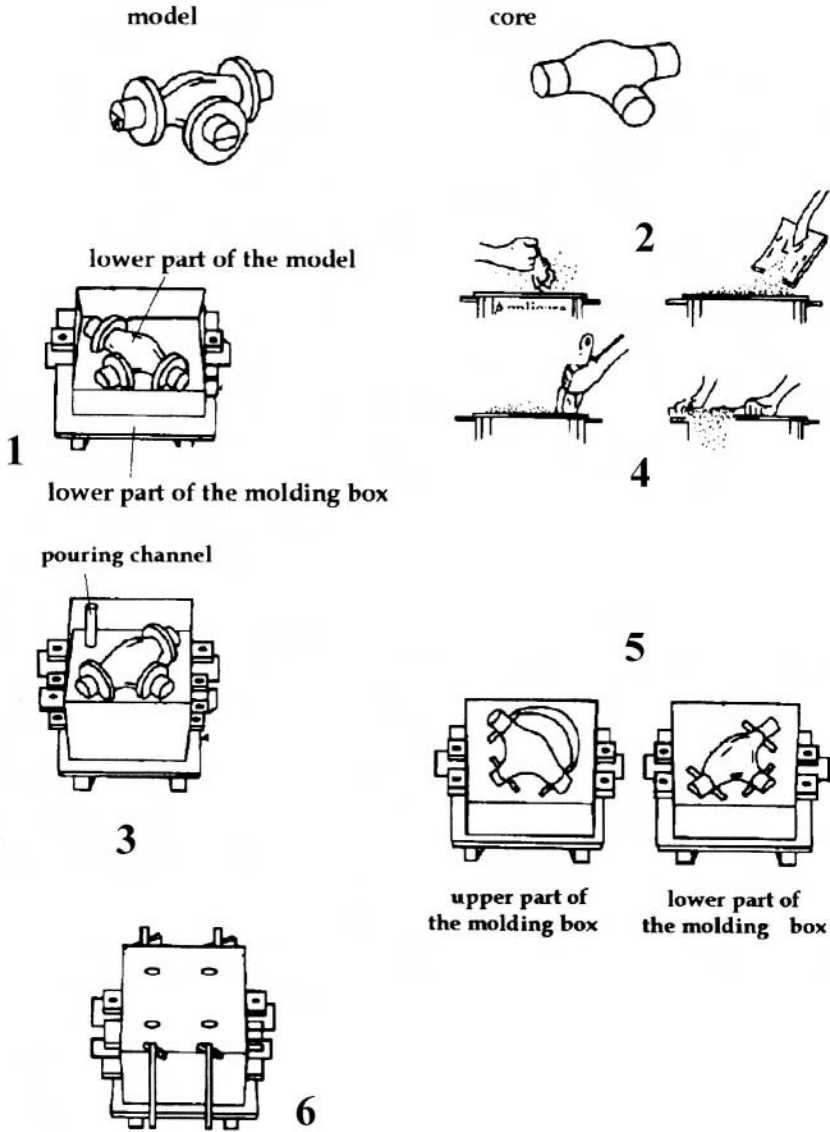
Production of castings by sand mold casting. Positioning the lower part of the model in the lower section of the molding box laying on the die shoe (1); setting up the lower part of the mould (2); positioning the upper part of the model and of the molding box upon the lower one (3); setting up the upper part of the mould (4); once the molding boxes separated, taking off the models, positioning the core and closing the molding boxes (5); molding boxes closed together ready to the pouring of the metal (6).
